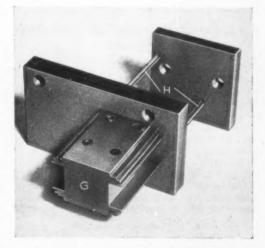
A View of the First-stage Punch Assembly, which Comprises a Blanking Punch, and Auxiliary Piercing Punches
